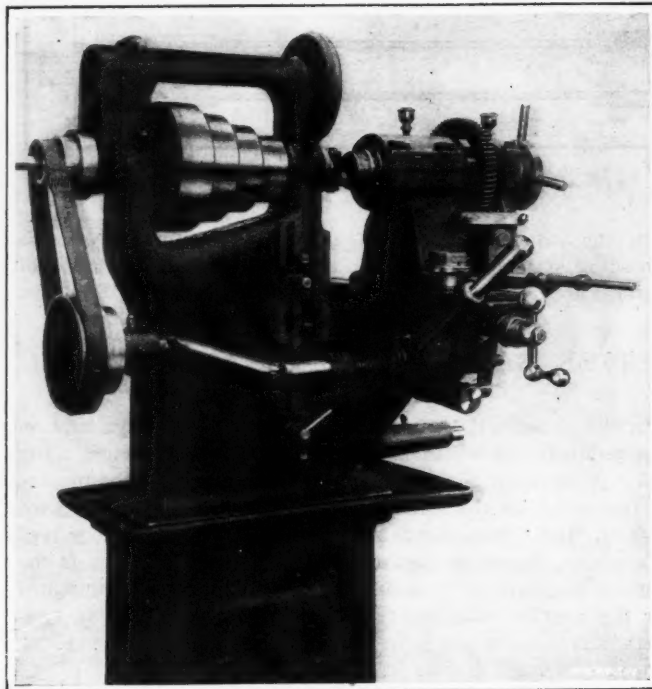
Side View of American Ammunition Co.'s Thread Miller set up on Hand Milling Machine
